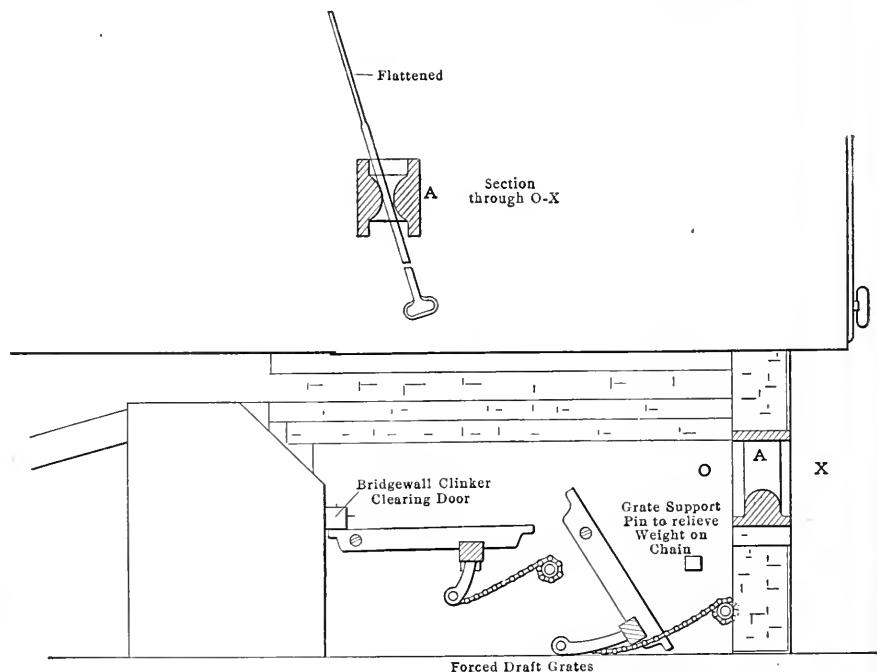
SHOWING SECTIONS THROUGH CASTING FORMING THE BAR DOOR, ETC.
